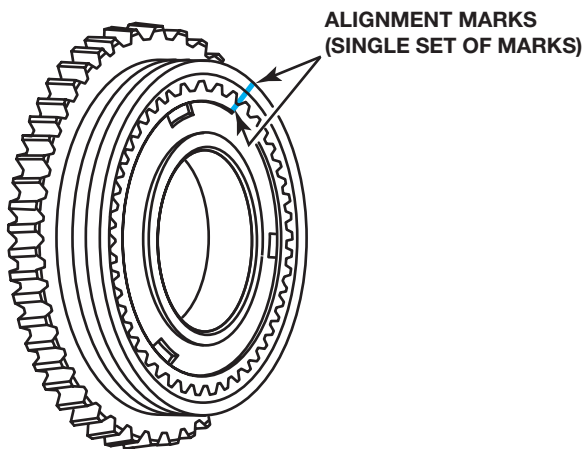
A synchronizer sleeve should never be removed from its hub without first checking for alignment marks or adding alignment marks if there are none. A mispositioned sleeve can cause hard shifting.
